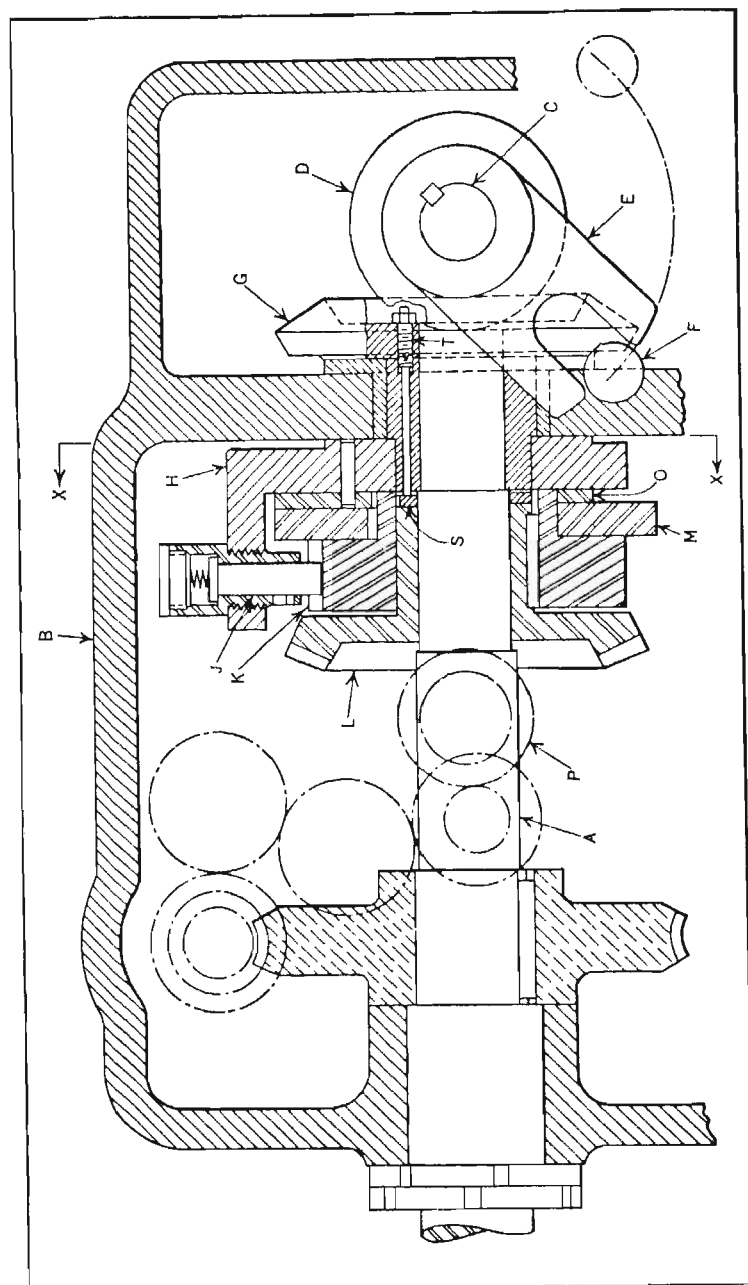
Self-locking Indexing Head for Obtaining a Large Number of Divisions
